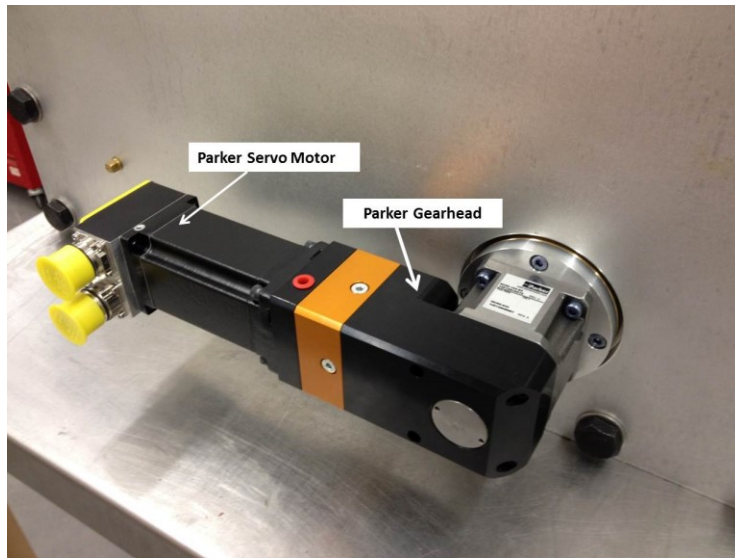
Parker servo motor with the Parker gearhead after installation.
